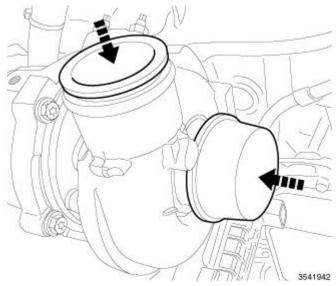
Covers/Caps Courtesy of CHRYSLER GROUP, LLC
